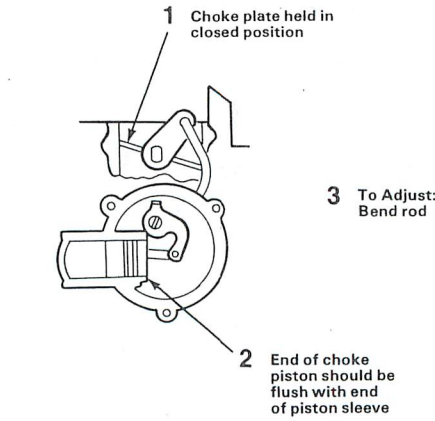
INTERMEDIATE CHOKE ROD ADJUSTMENT
